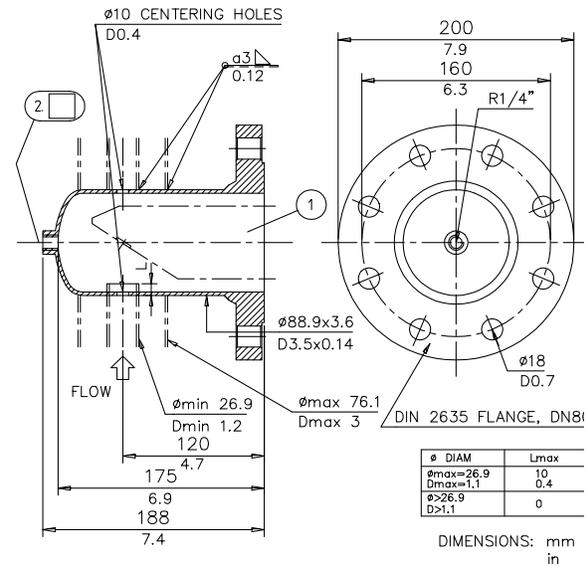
Flange mounting DIN 2635 DN 80. Note for ANSI B16.5 3" RF 150 psi or JIS 10K 80A separate drawings are provided.
